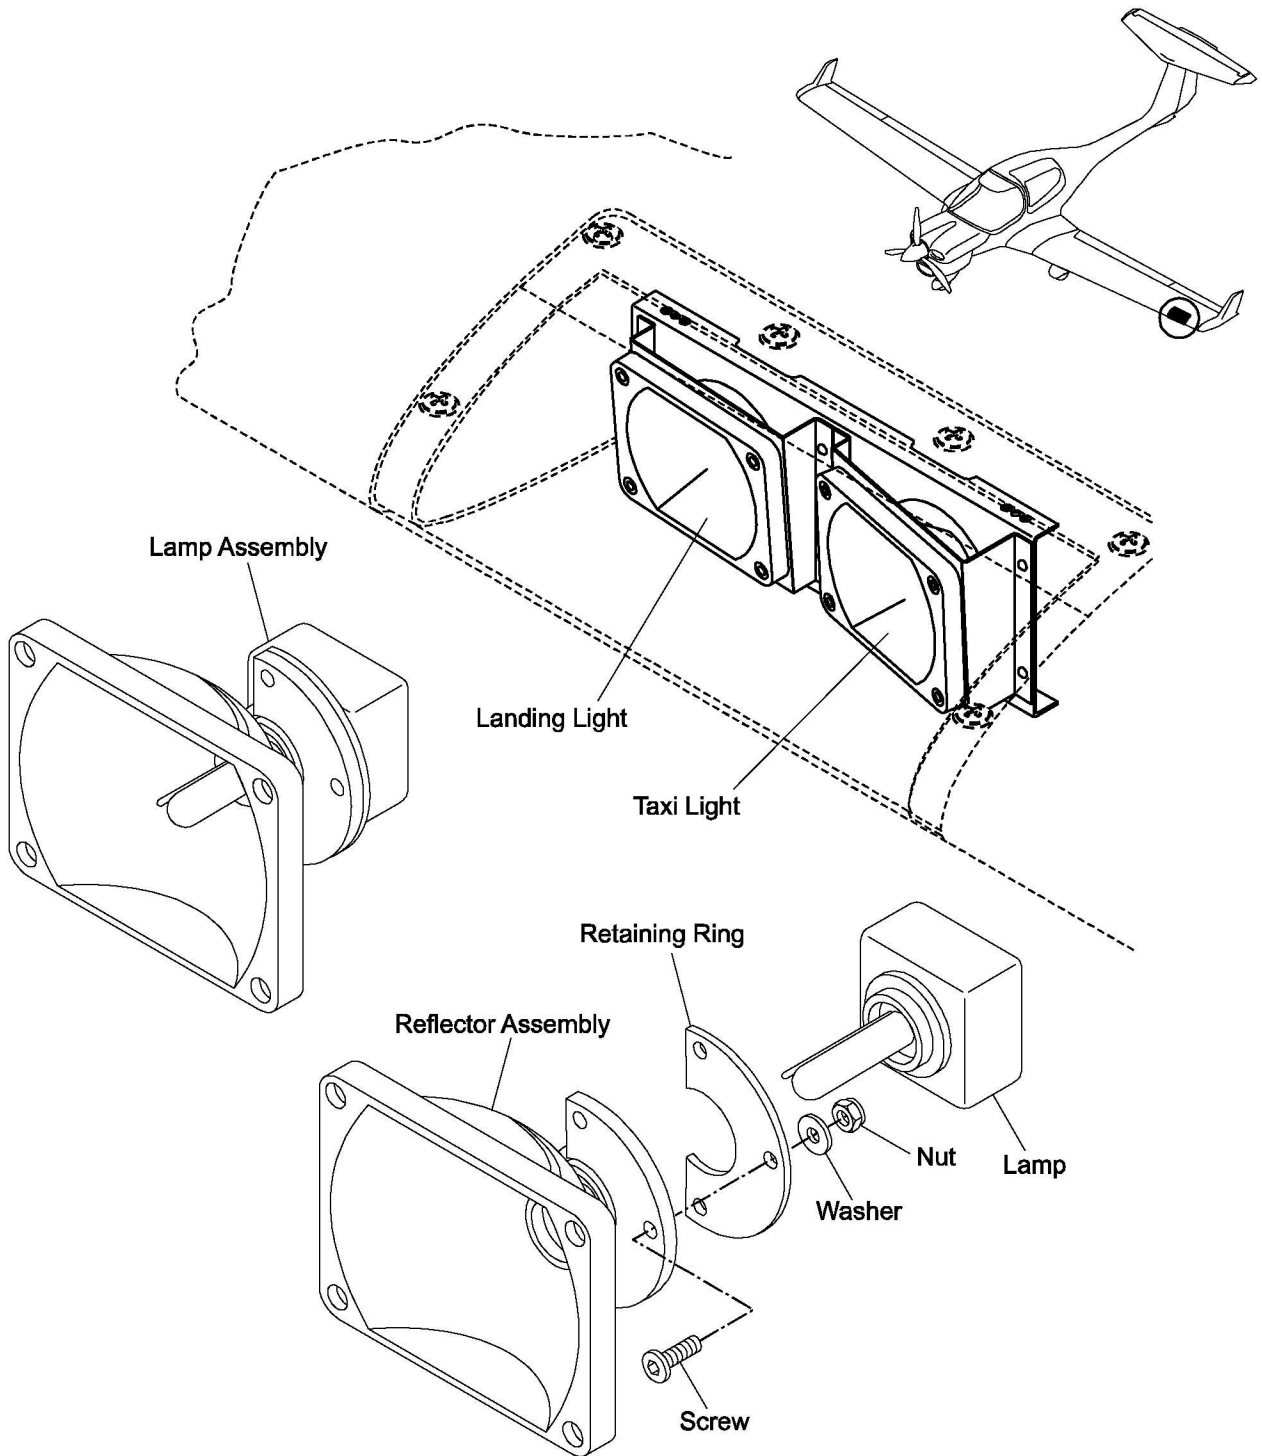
Reflector and HID Lamp Assembly (if OÄM 40-258 is installed)
